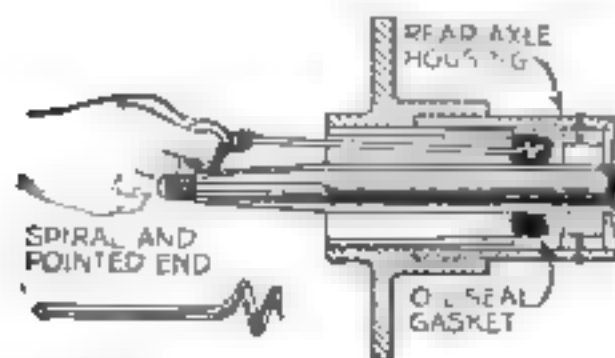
This homemade corkscrew of heavy wire is useful in removing felt packing
